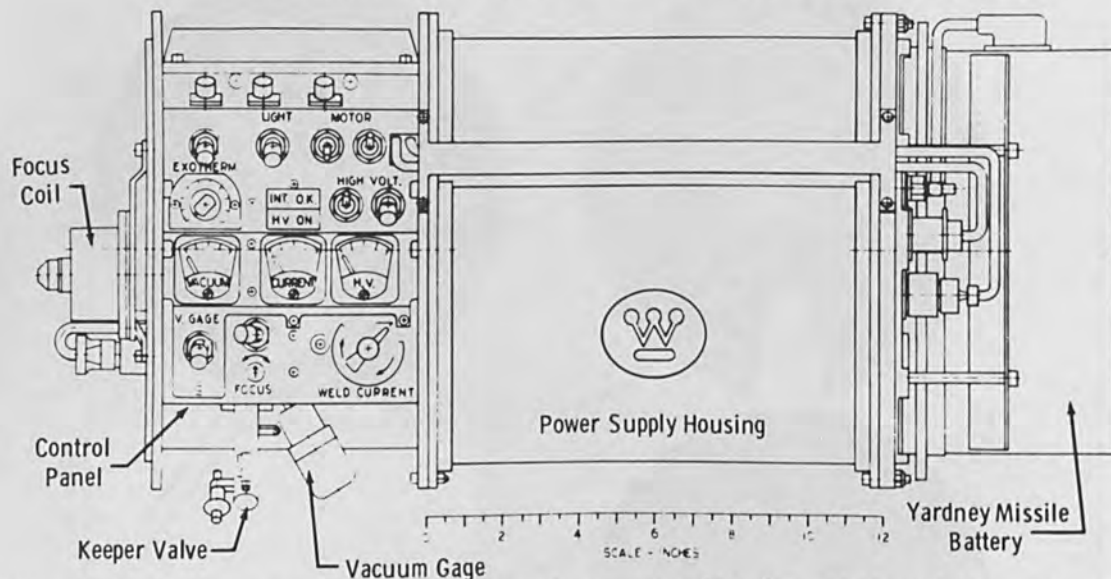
Battery-powered electron beam gun for in-orbit welding experiment.
